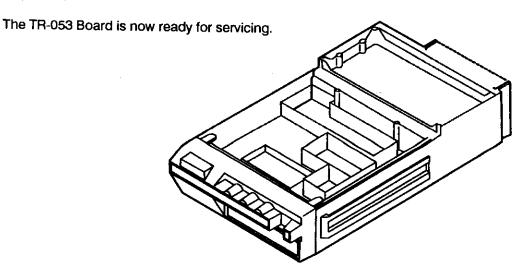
1a — SYN-TECH XTR Chassis and Control Head
